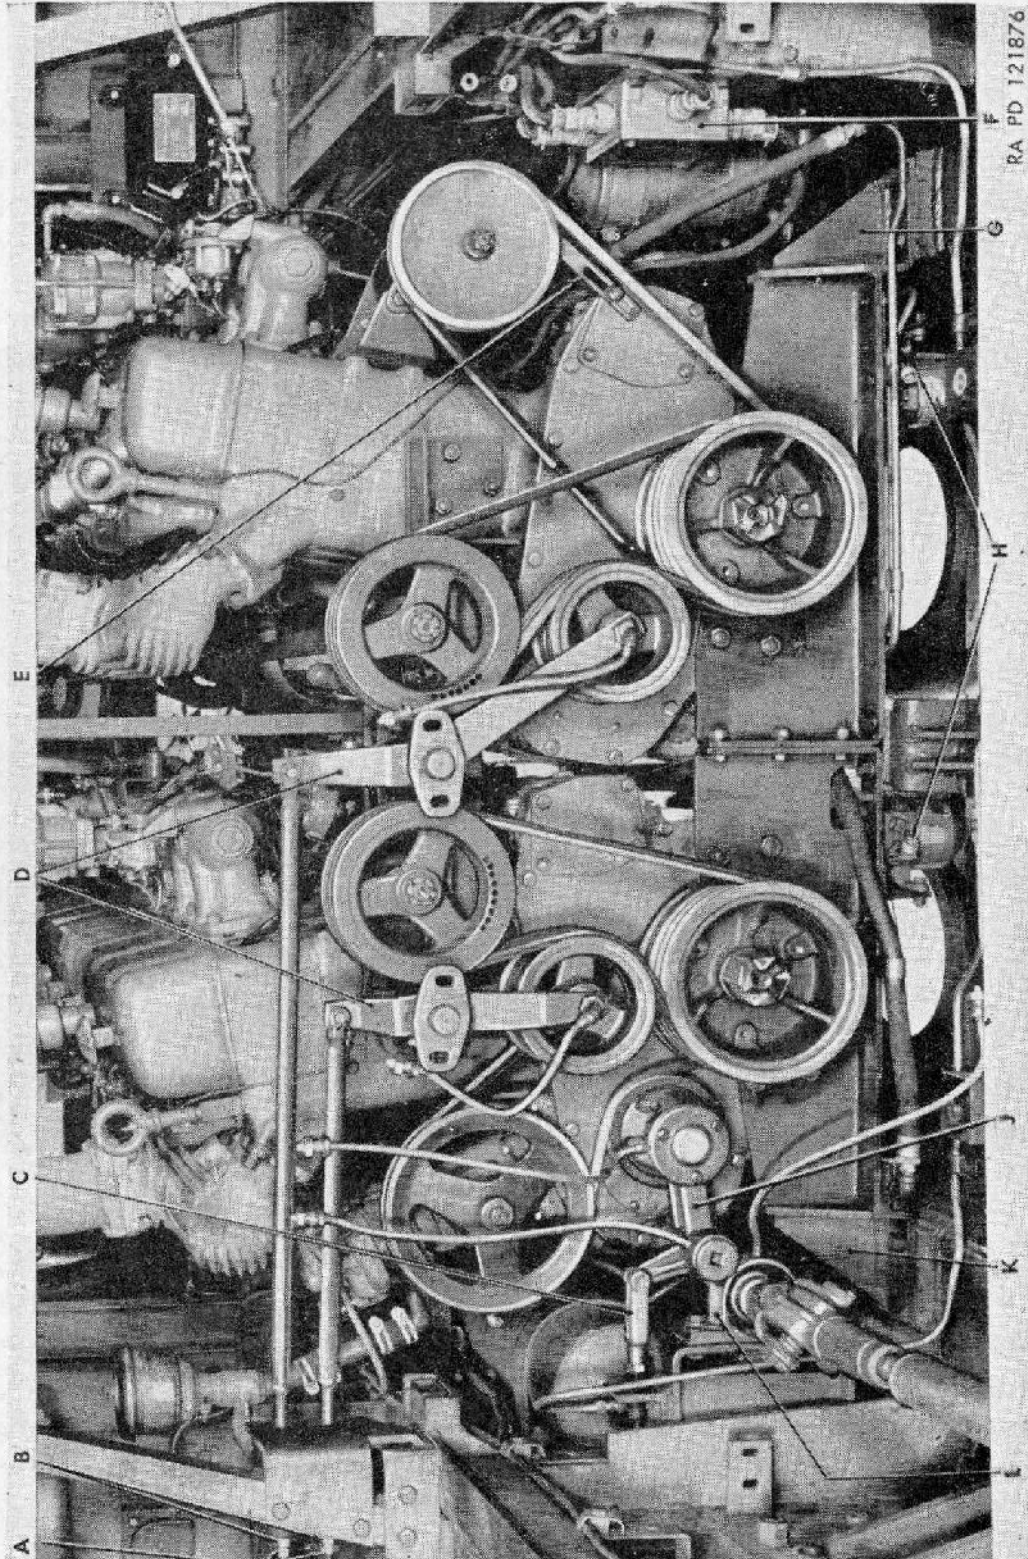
Fan, air compressor, and generator drive belt arrangement.
